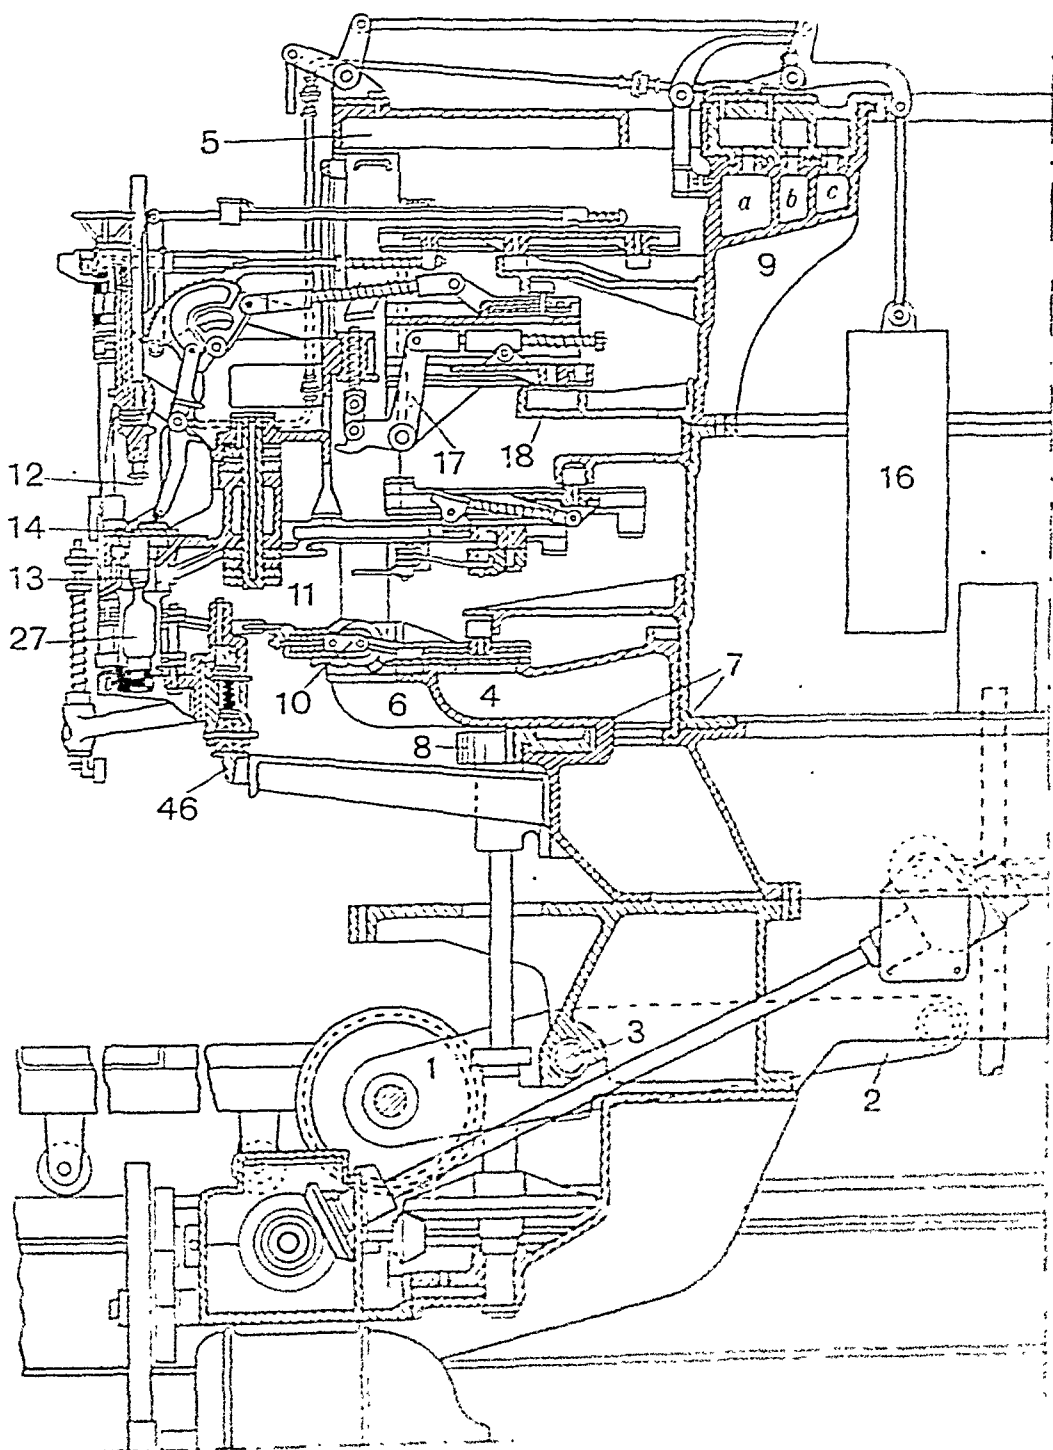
PART SECTION OF OWEN'S MACHINE USED.
